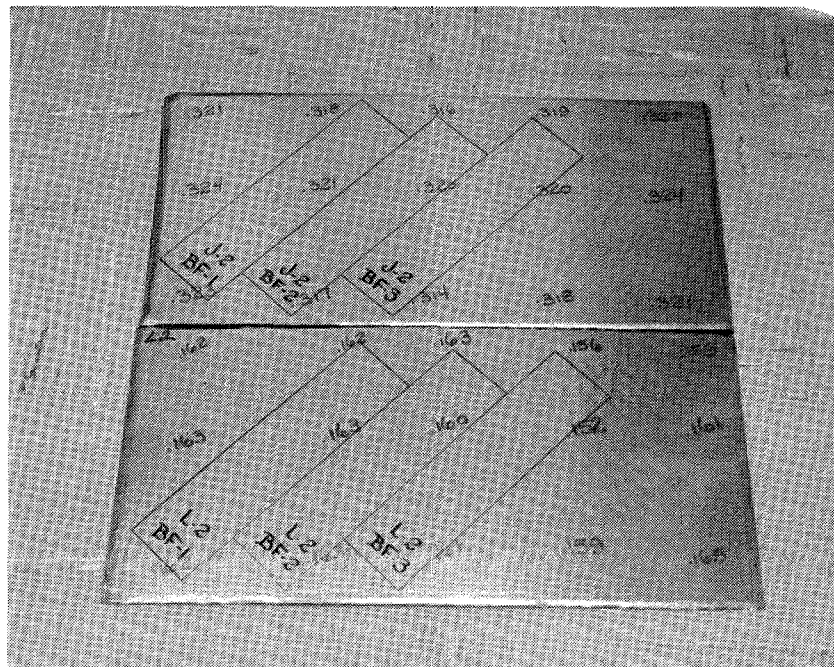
Panels J2 and L2 Showing Thickness and Specimen Layout
